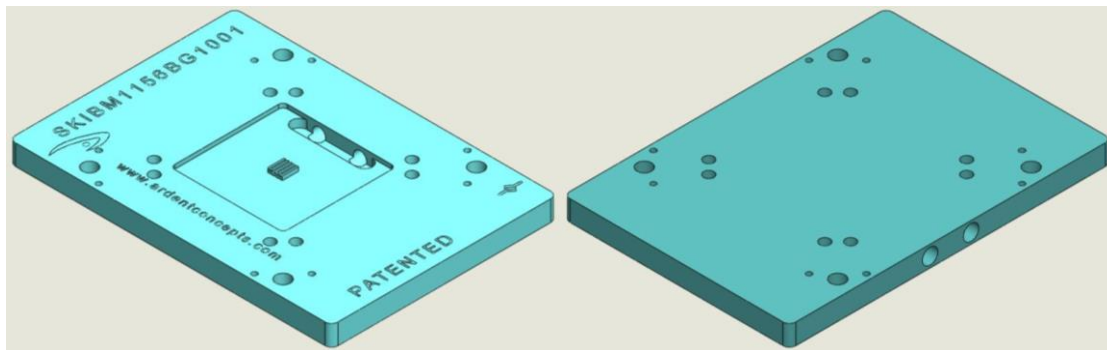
Cavity and flat sides of the assembly fixture. This part is made of clear ESD Lexan and doubles as a shipping cover. This is an important part of your socket and should be kept as a protected covering for the board side of the socket anytime it is not mounted on a PCB. If the socket ever needs to be returned to the factory, it should be shipped on flat side of this fixture mounted with fasteners and with a stiffener assembly.
